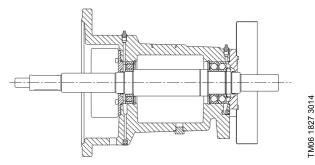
Bearing bracket with open roller bearing and double angular contact bearing lubricated via grease nipples
